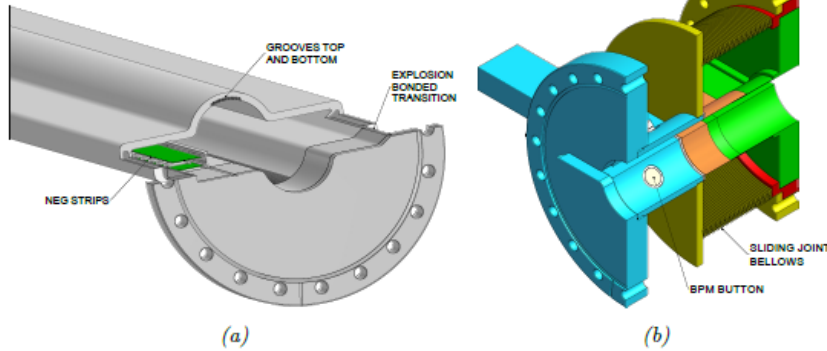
(a) Dipole Chamber with grooved top and bottom surfaces, radially inside antechamber with NEG strips, and radially outside antechamber with sloped wall. (b) BPM and sliding joint assembly. [17].
